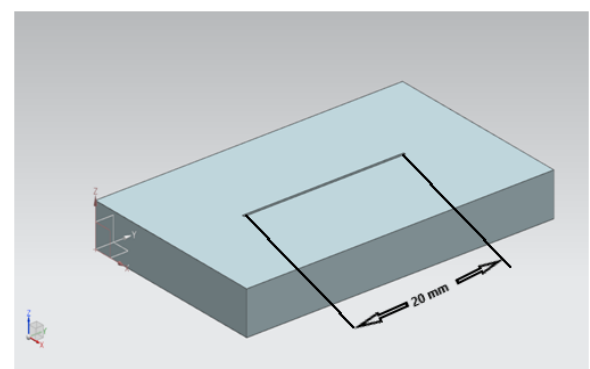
Auto Cad Design of Microslot on Copper Workpiece
